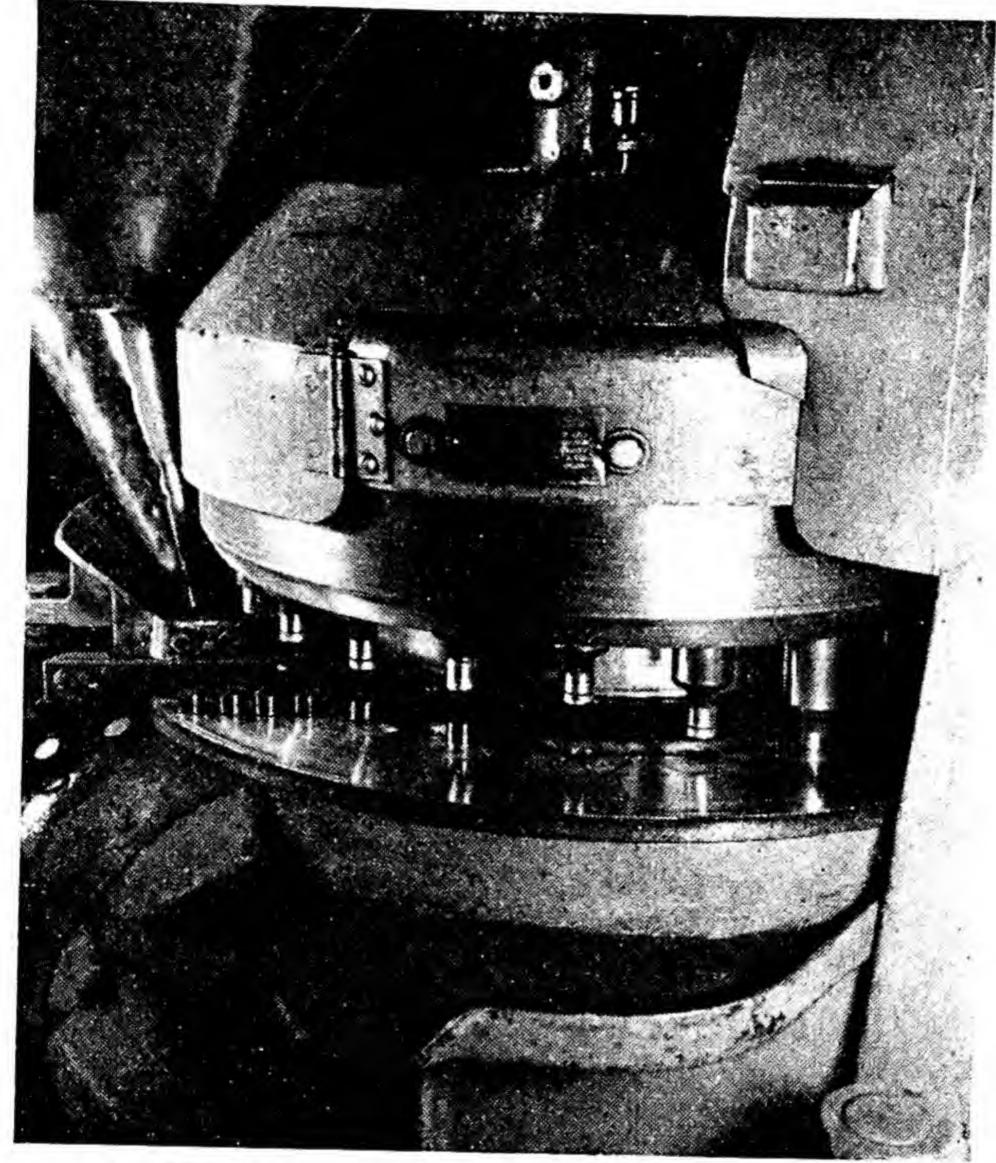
Rotary preforming machine. (Bakelite Corp.)
